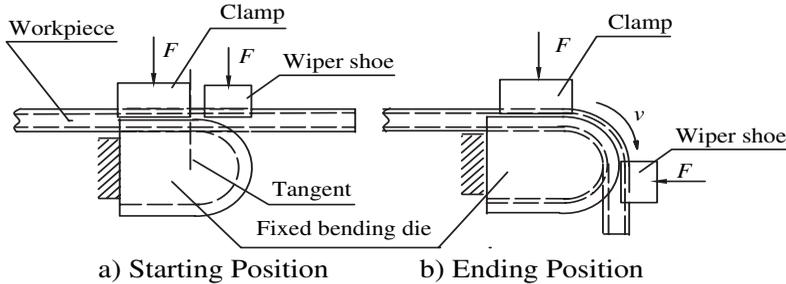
Compression Bending: a) Starting Position; b) Ending Position
